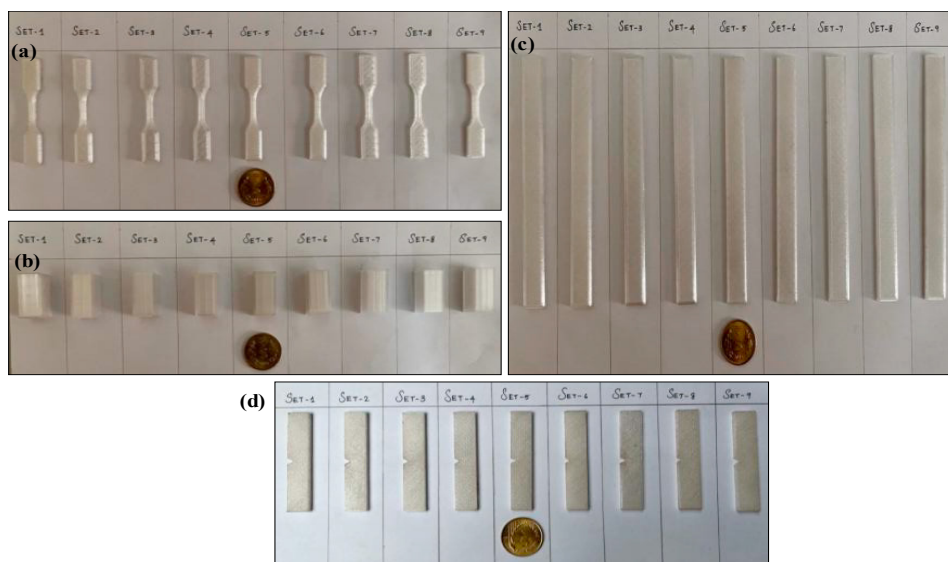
FDM Printed samples of (a) tensile specimen; (b) compression specimen; (c) flexural specimen; (d) impact specimens.
